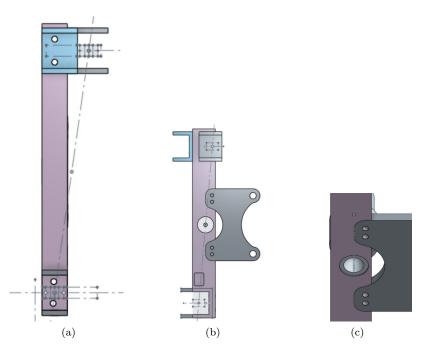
Views of the upright. (a) side view of the upright showing the king pin axis and location of wishbone bearings in gray dotted sketches (b) back view of the upright showing the caster angle and location of wishbone bearings in gray dotted sketches (c) Embedding of upright-caliper attachment piece in the main structure of upright.
